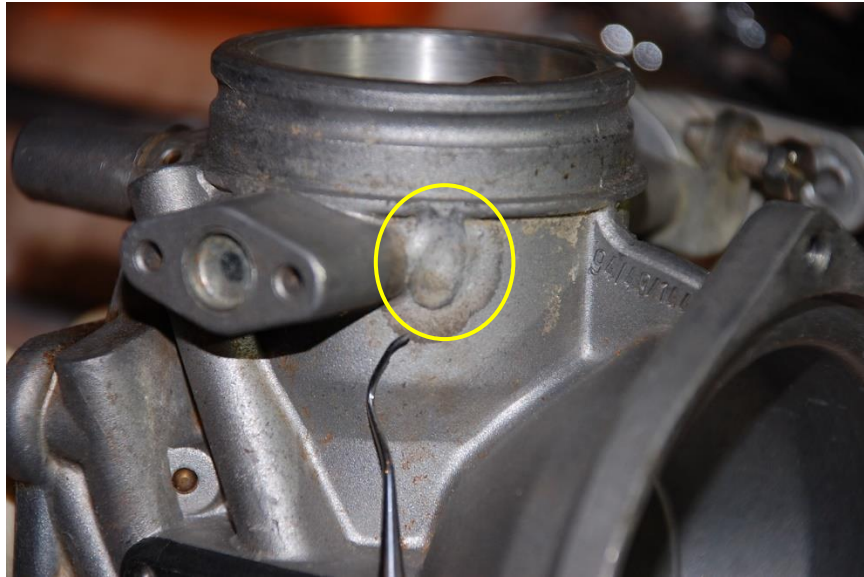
Previous weld repair to the carb body (yellow circle).
